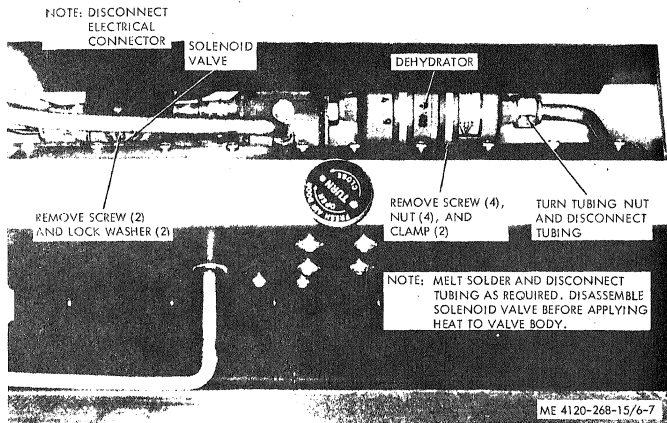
Solenoid valve and dehydrator, removal and installation.
